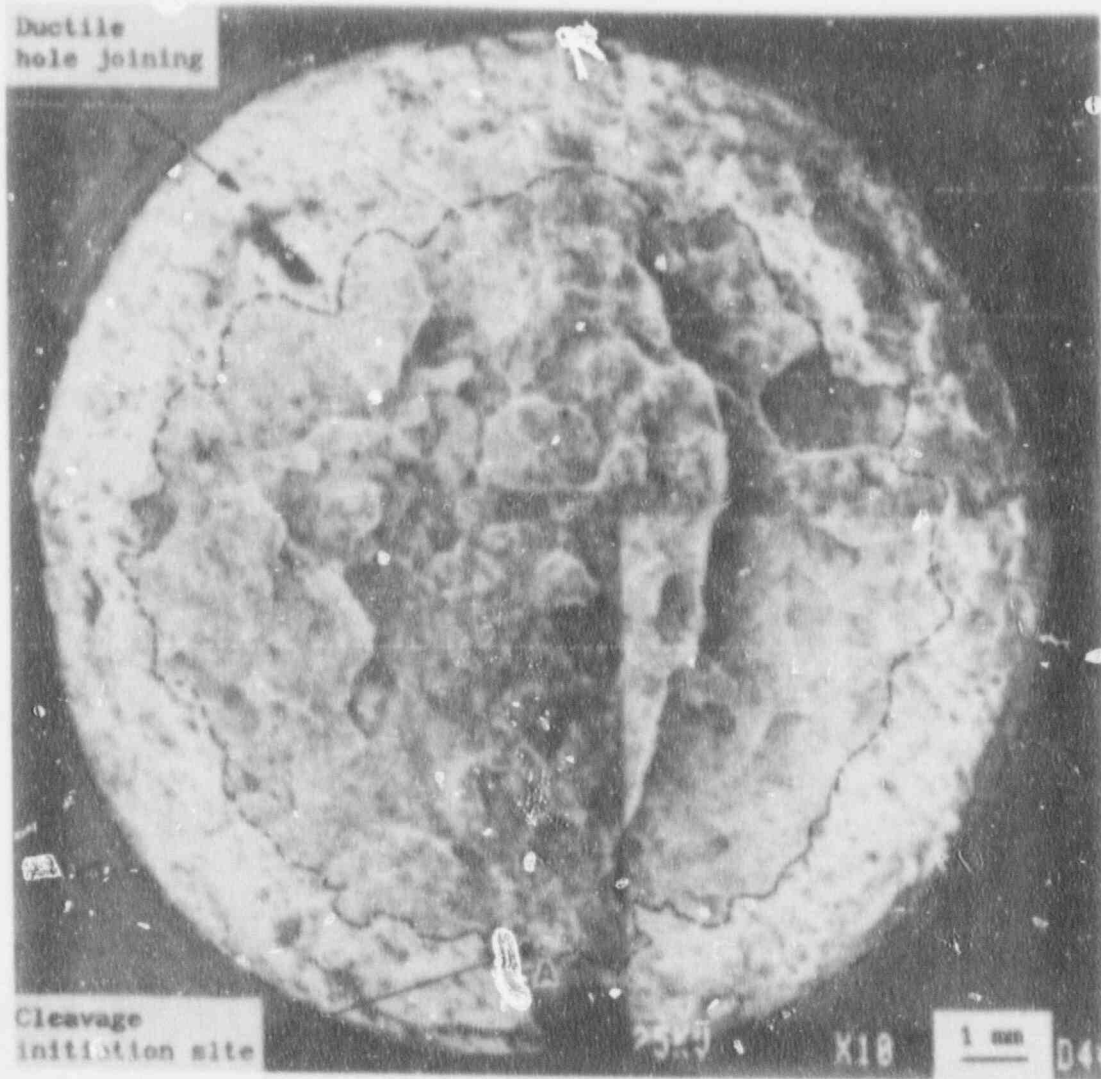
Fracture surface exhibiting extensive ring area where crack extension occurred by hole joining before cleavage initiation
